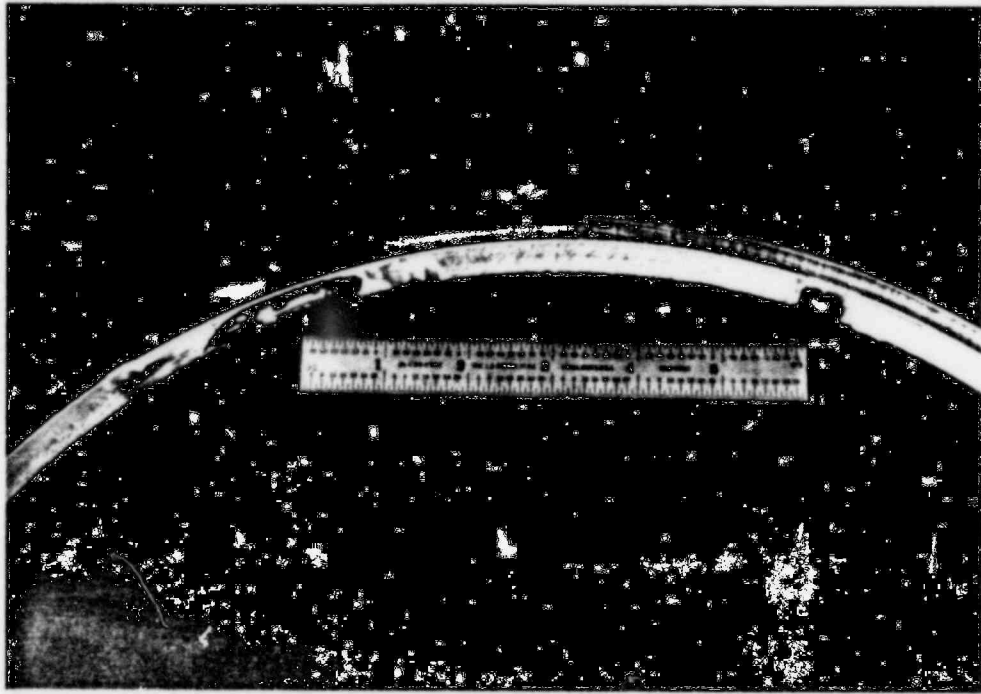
Grind outs in low pressure coolant injection system check valve disc.
